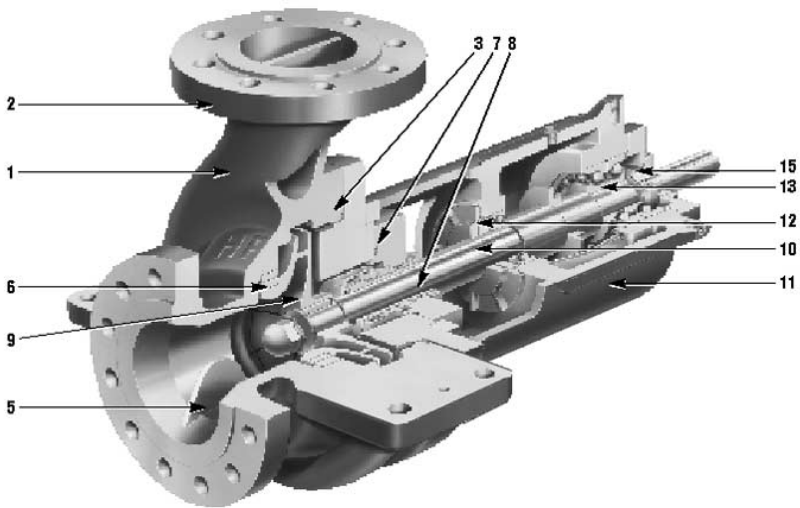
Single stage overhung refinery process pump—API 610 Type OH2. (1) Pump casing, (2) Discharge flange; flanges are standard ANSI B16.5 Class 300, (3) Metal-to-metal casing joint with fully confined, controlled compression gasket, (4) Casing drain at bottom of volute (not shown), (5) Suction nozzle guide vane (featured on some models), (6) Renewable casing and impeller wear rings, (7) Seal chamber with minimum standard dimensions, (8) Cartridge mechanical seal, (9) Impeller—dynamically balanced, (10) Shaft—heavy duty to minimize deflection, (11) Bearing housing, (12) Finned bearing housing cover for air circulation and cooling, (13) Single-row radial and back-to-back mounted angular contact thrust bearings are standard, (15) Labyrinth-type bearing housing closures on both ends, (Flowsolve Corporation)
